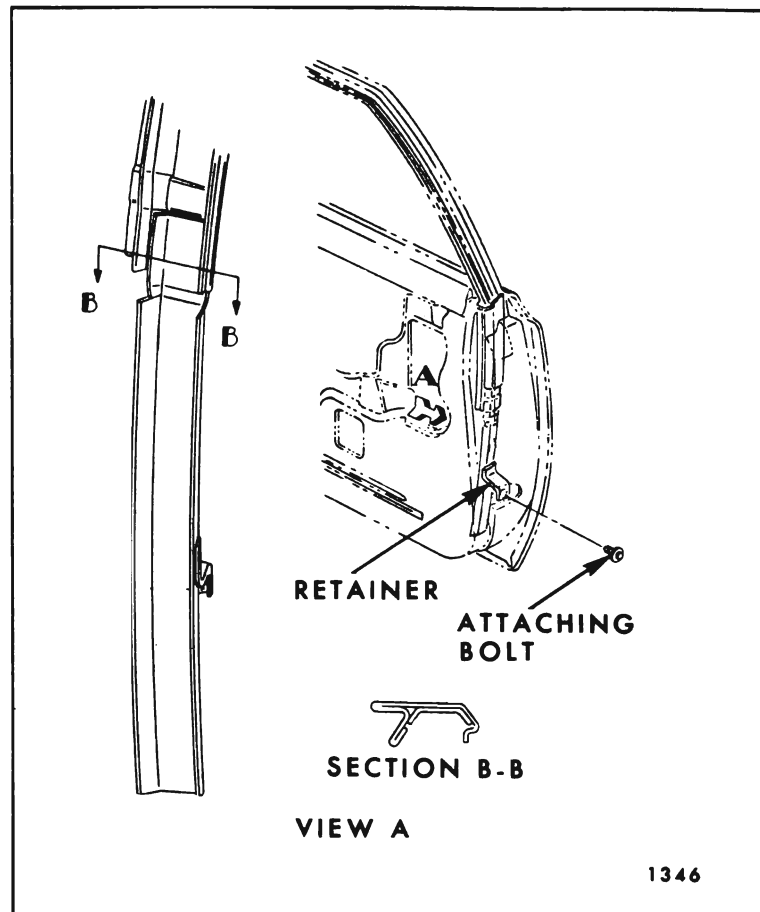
Door Window Glass Run Channel Lower Rear Retainer - "A" Styles
